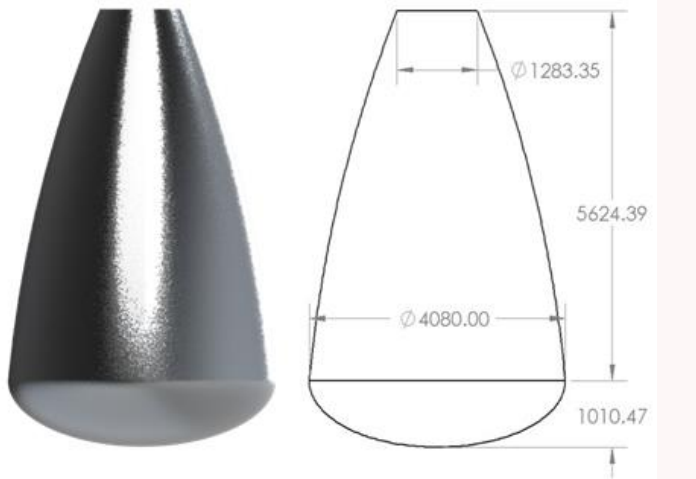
Render and Dimensions of Exterior Shell (mm)
